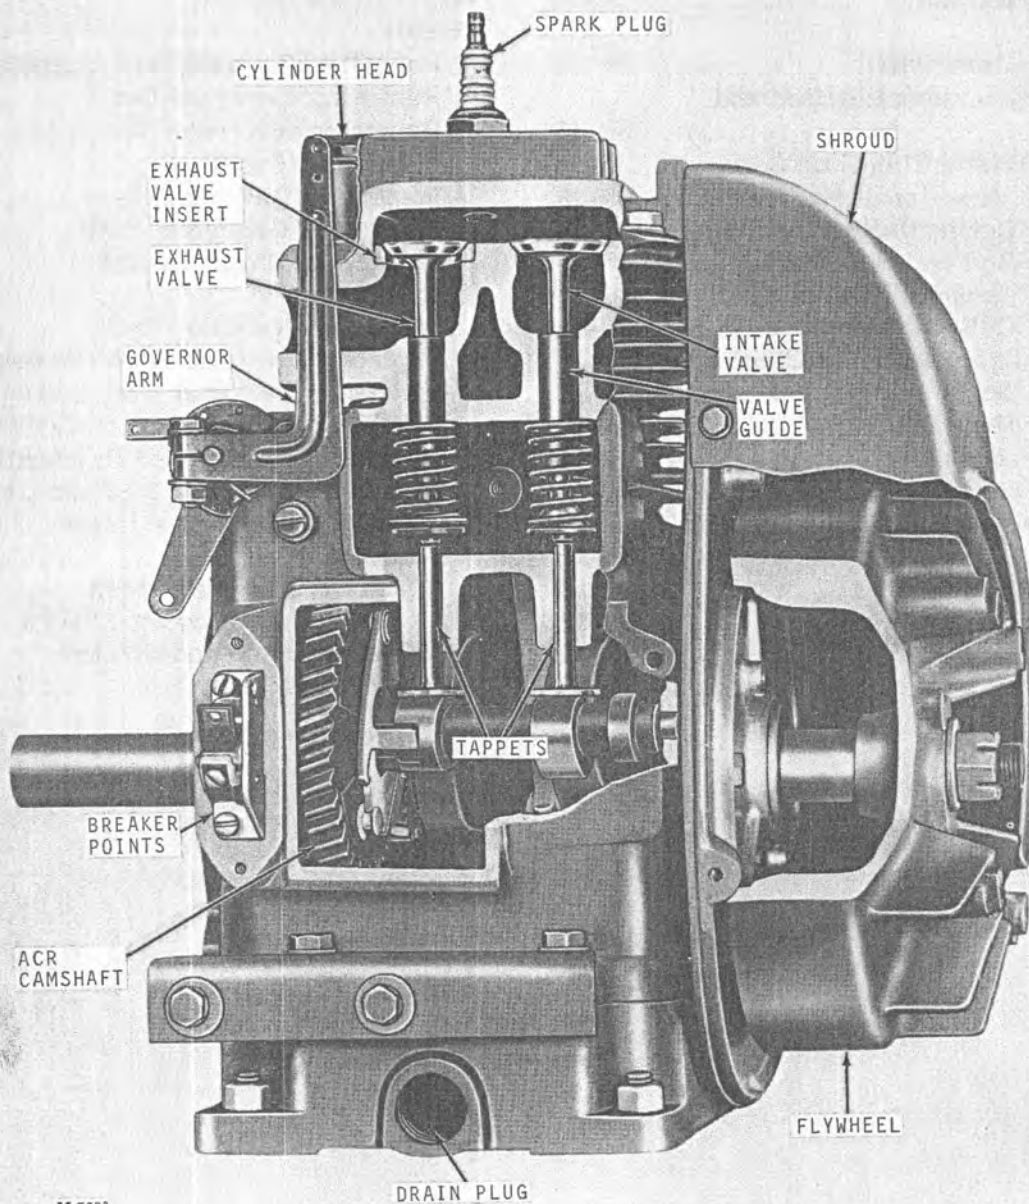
Cutaway View of Kohler K181S Engine Showing Valves and Tappets
